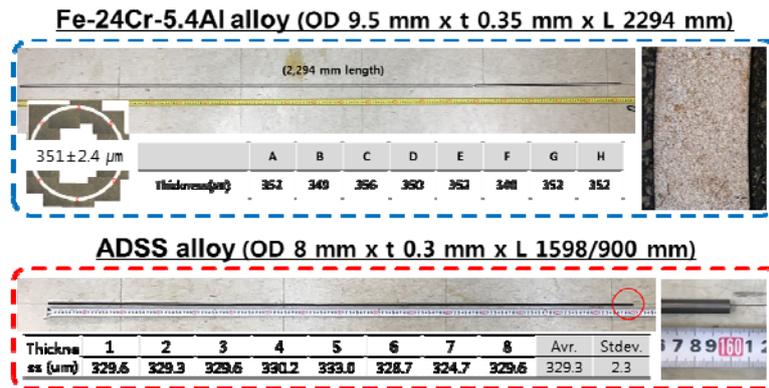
Photo of FeCrAl tube fabricated by pilgering with a dimension of 9.5 mm OD x 0.35 mm t x 1.9 m L.
